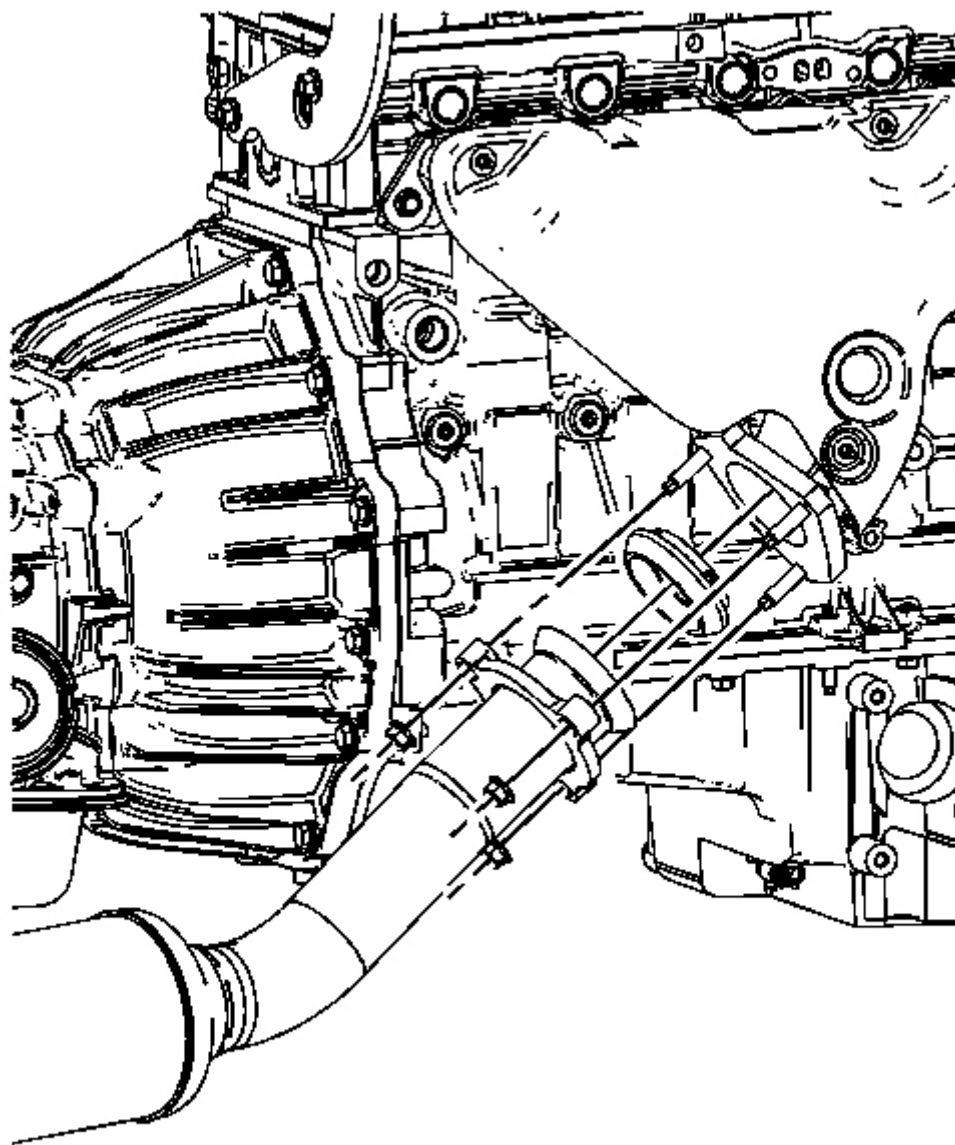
View Of Catalytic Converter Pipe - 4.2L
